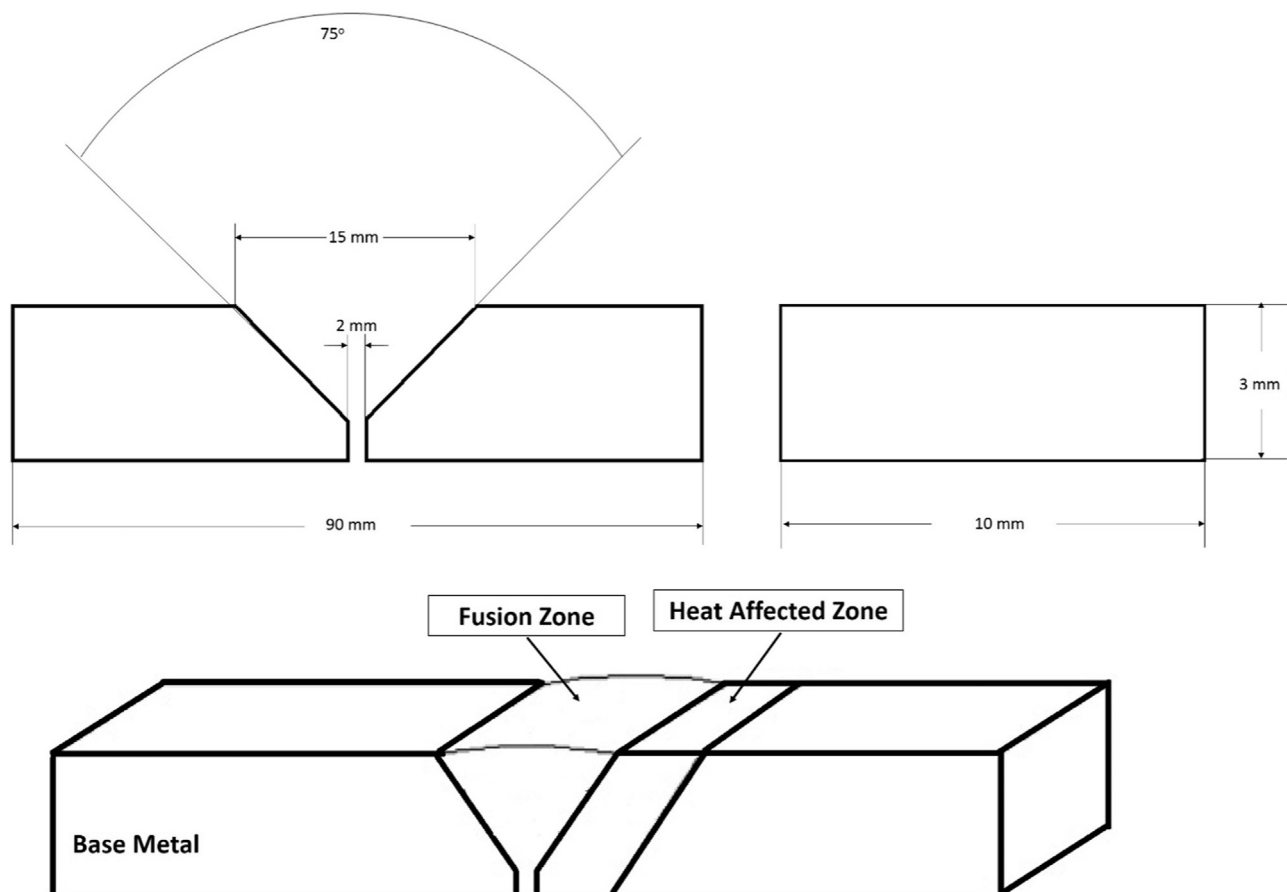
Dimension of welding plate of 304/430 dissimilar metals.
